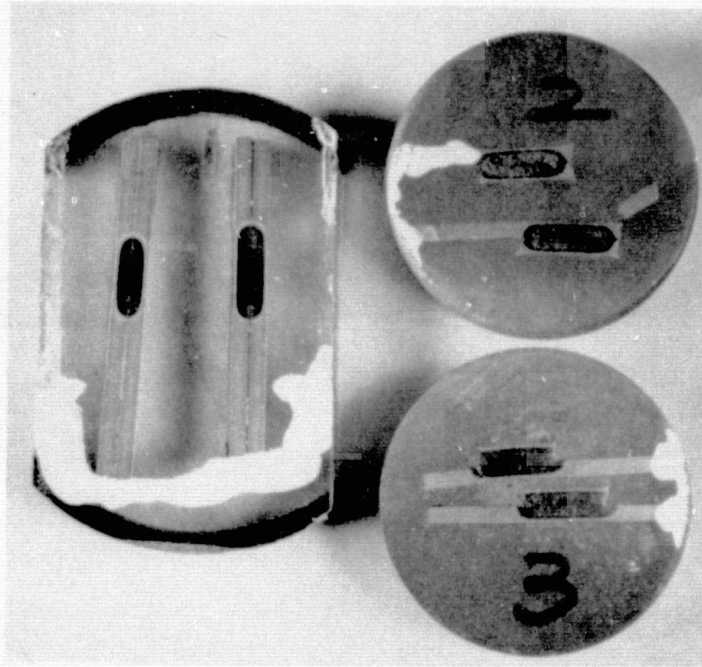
Mounted Samples (Dissected weld nugget samples mounted ready for examination. White areas are silver paint. Mount 1 contains unbroken samples, Mount 2 contains broken samples, and Mount 3 contains broken weld bonded samples.)
